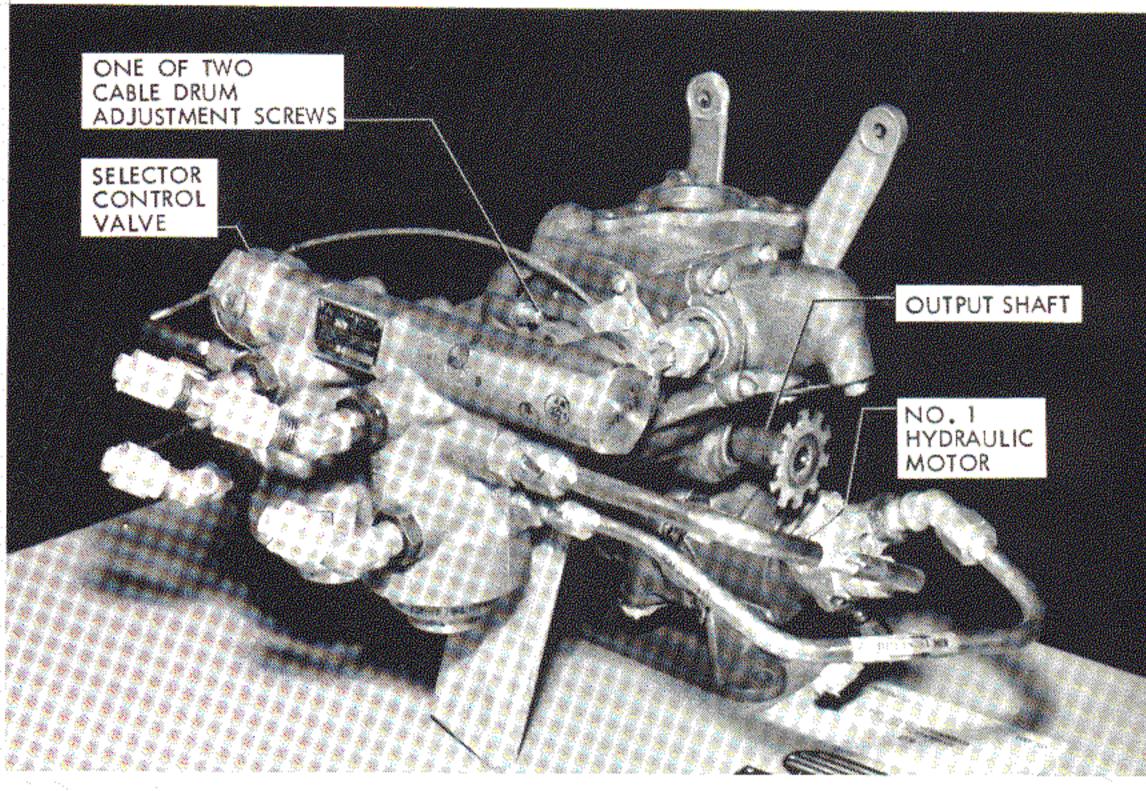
Wing Flap Drive Unit — Flap Position Transmitter and Rudder Booster Shutoff Switch and Gearbox not Installed
